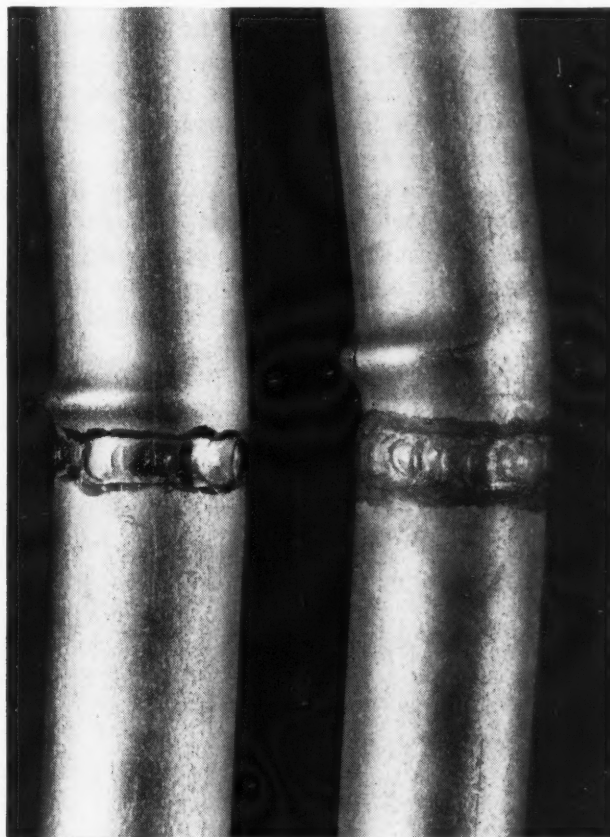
Compression failures of welded joints. (Left) Shielded-arc welded joint subjected to an 18,750-pound load. (Right) Oxy-hydrogen-torch welded joint under a 14,500-pound load
